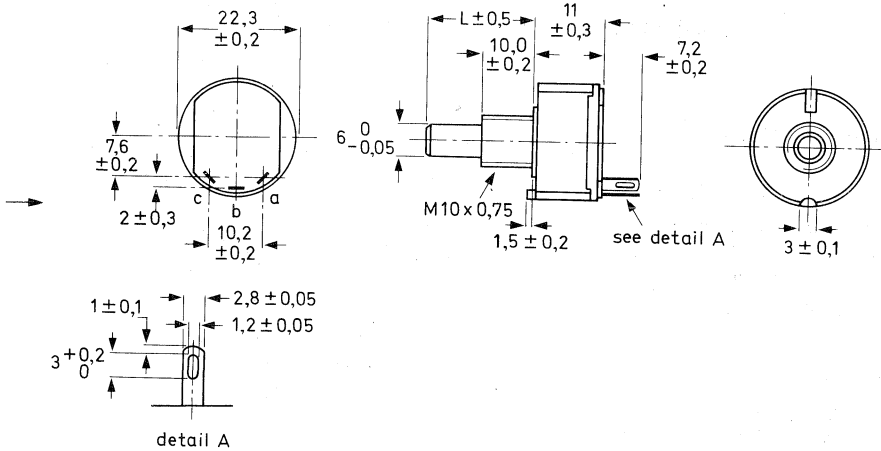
Potentiometer with plain spindle; spindle length L is 17 mm, 20 mm, 30 mm or 60 mm.
